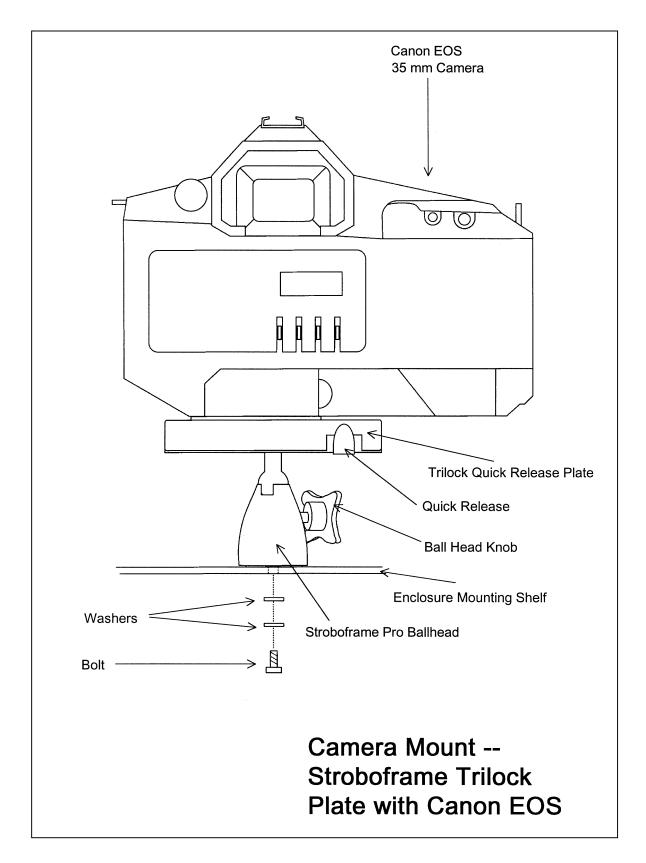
Automatic 35 mm Camera System Tripod Assembly.
